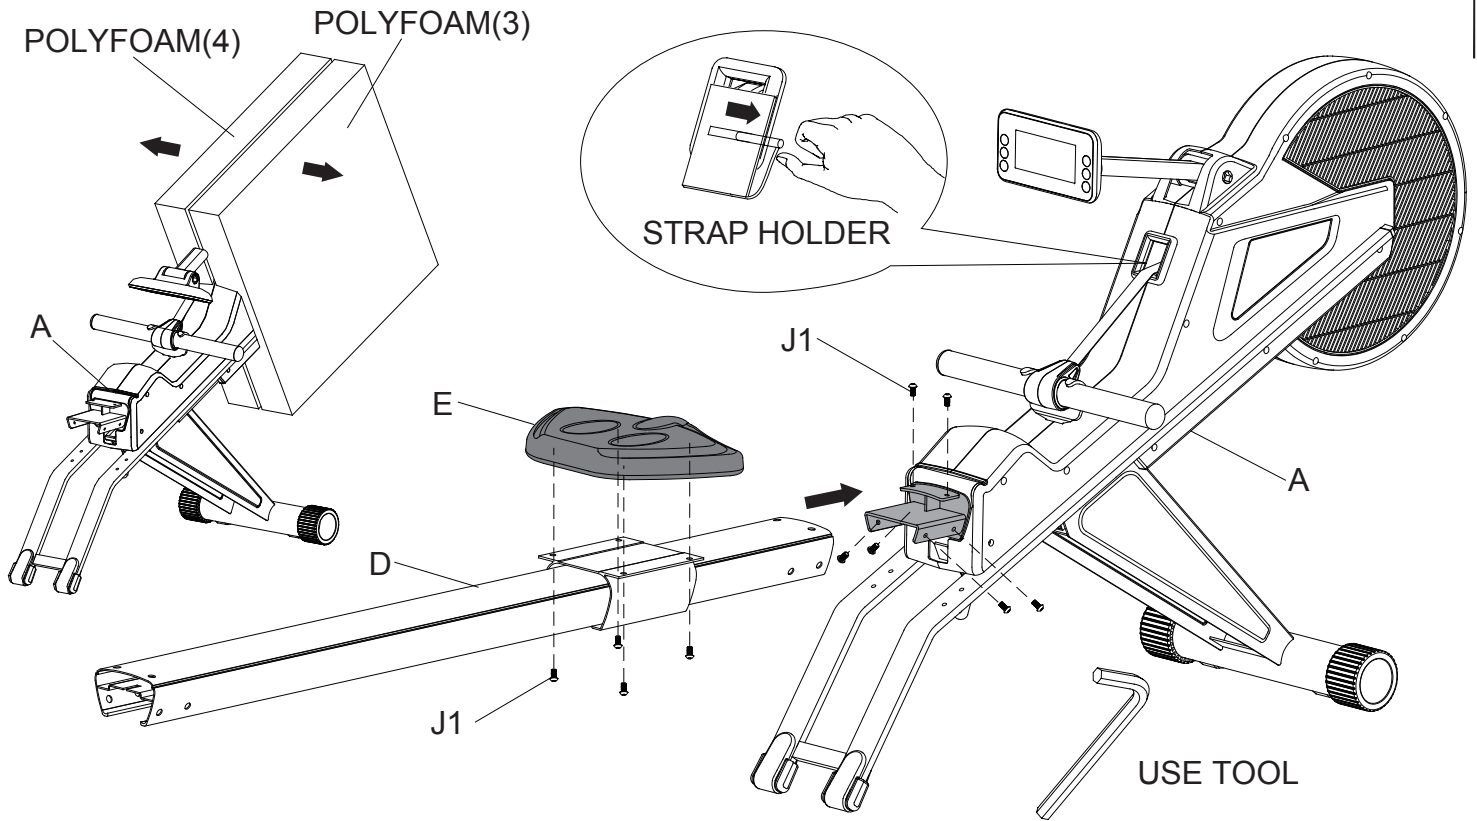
HOW TO ASSEMBLE THE REAR STABILIZER
